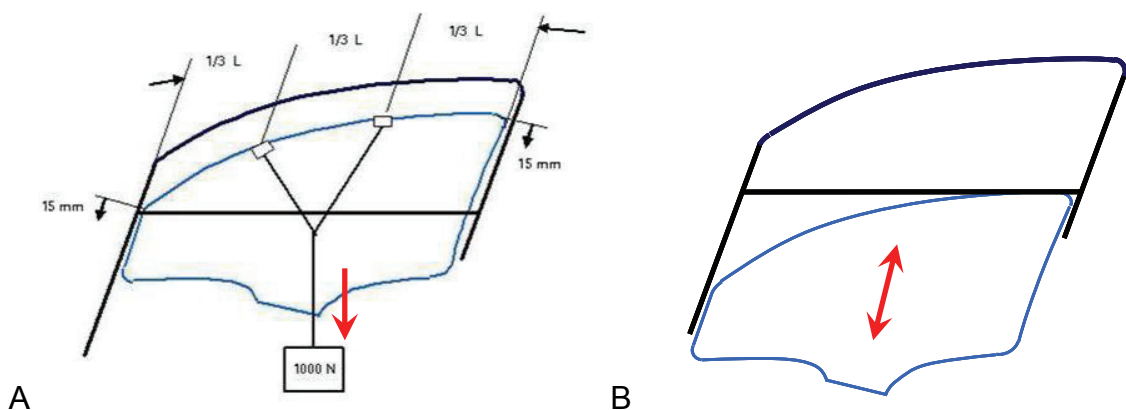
Load cases at drop window: A: Forced entry; B: Opening and closing with / without stopper (Badri, 2008)
